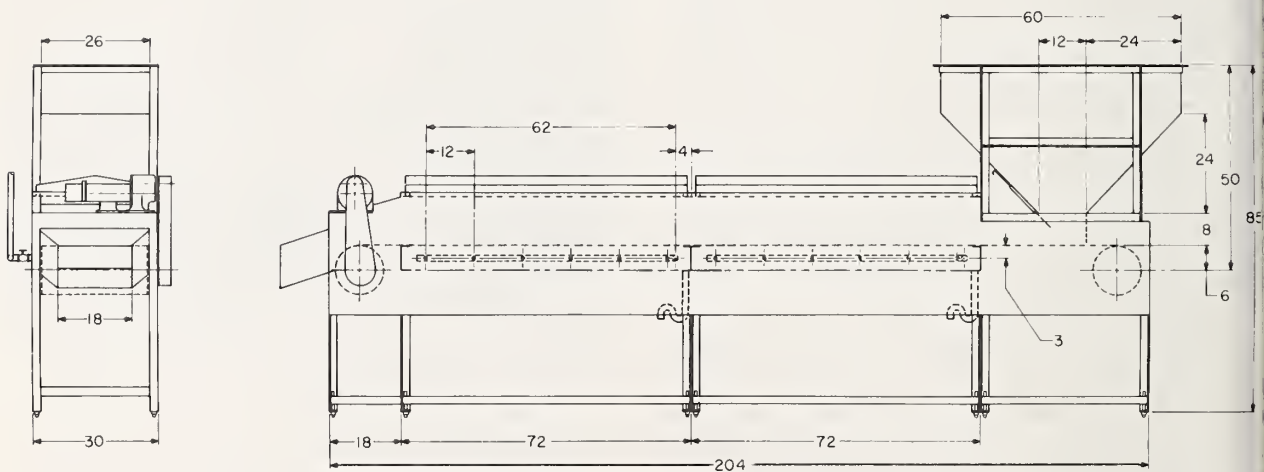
Dimension drawing of steam conditioner. Dimensions are in inches.
